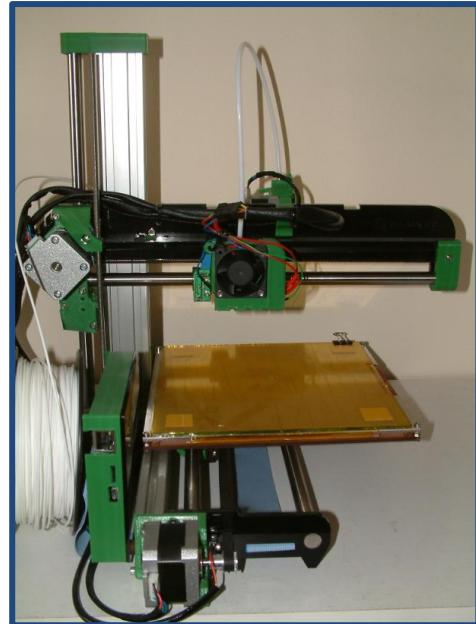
Photo's of Ormerod 3d printer and Eosint equipment
